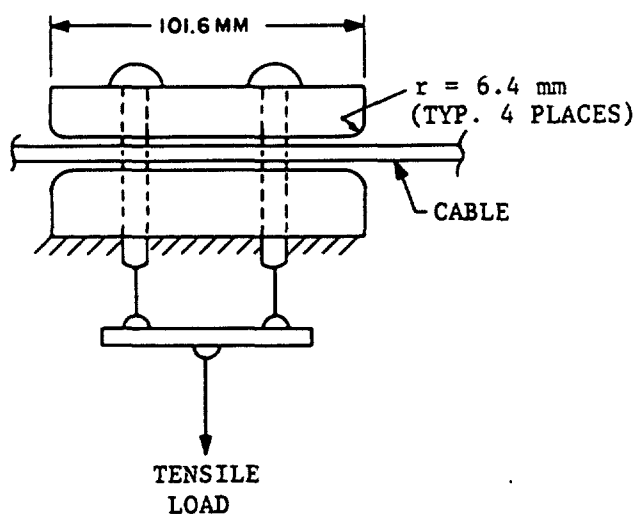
Test Arrangements for Crush and Shear Testing
